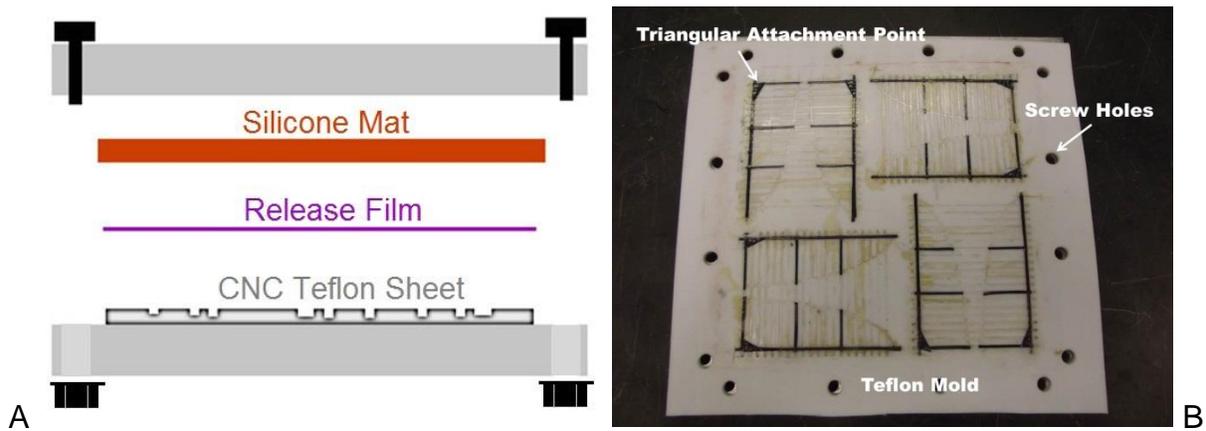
The Teflon<sup>®</sup> Mold in two views. A) An exploded view of the aluminum sandwich structure. B) Photo of post cure mold. Photo courtesy of Jason Rue.
